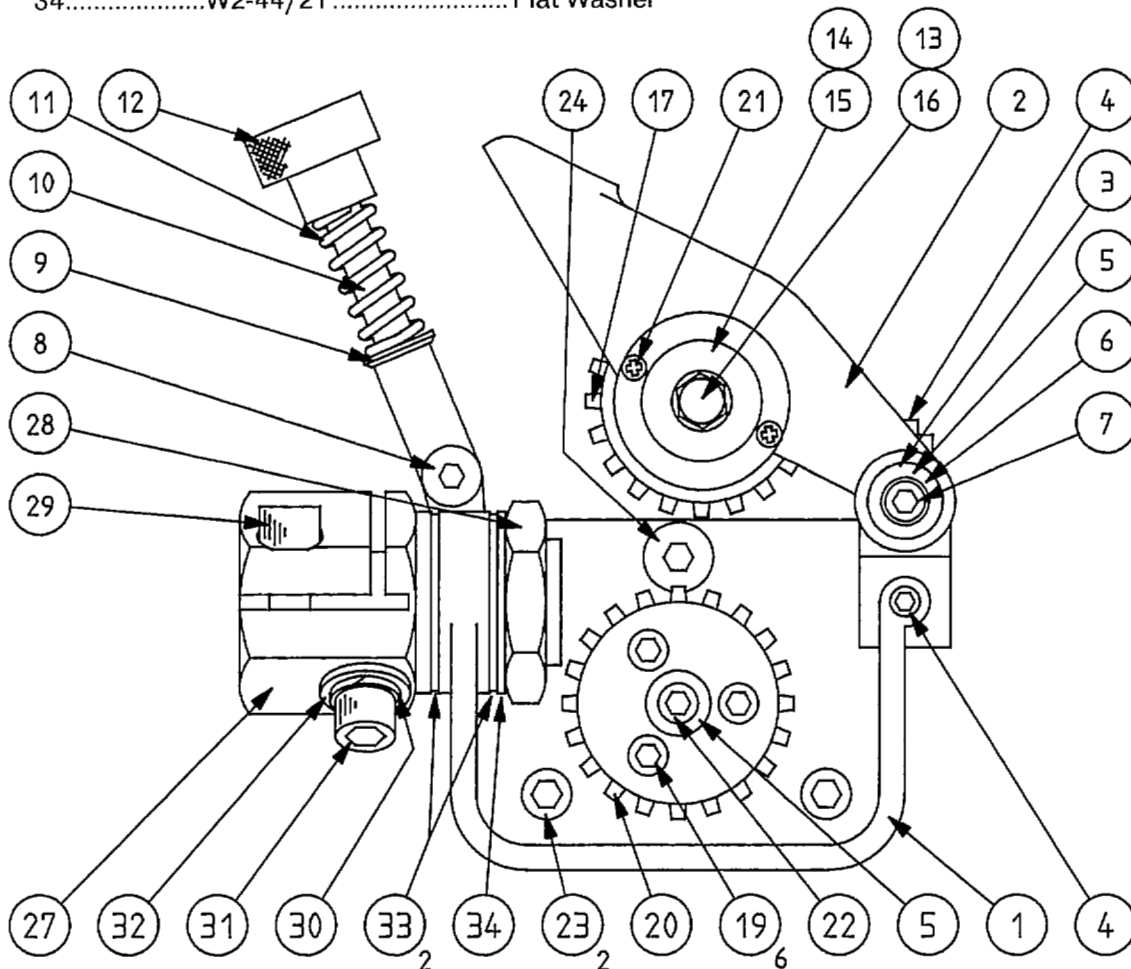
TWO ROLL DRIVE ASSEMBLY
